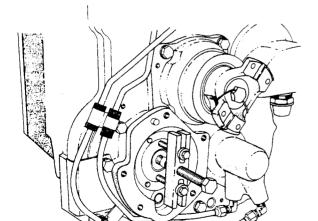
Removing Push-Start Pump Drive Disc (T-72375)
